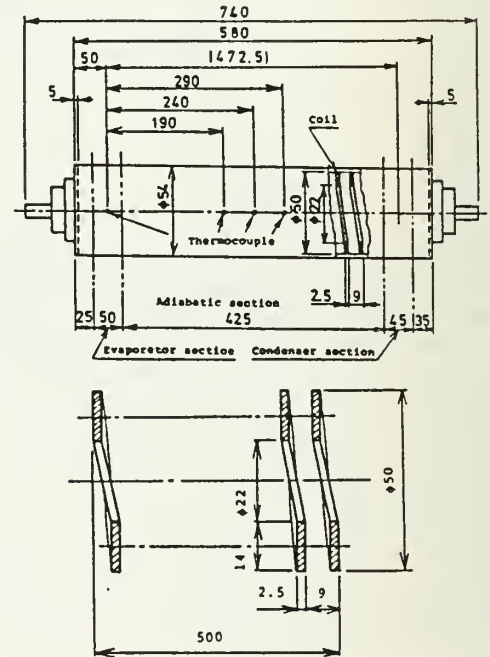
Heat pipe with rectangular section helical coil and the coil itself
